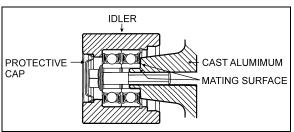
IDLER MOUNTED ON THE CAST ALUMINUM SUPPORT
